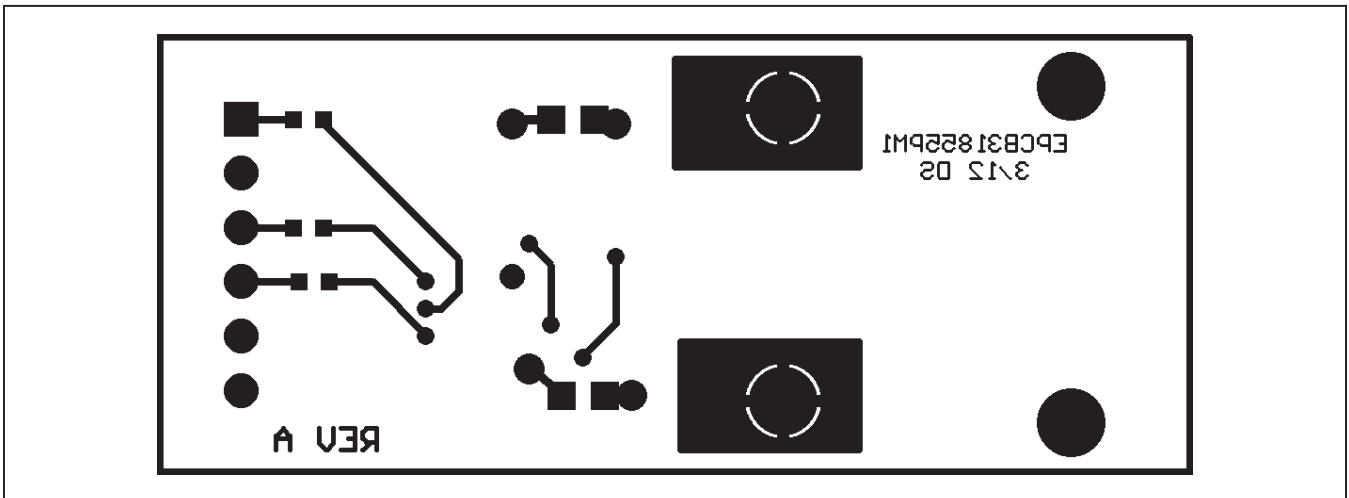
MAX31855PMB1 Peripheral Module PCB Layout—Solder Side
